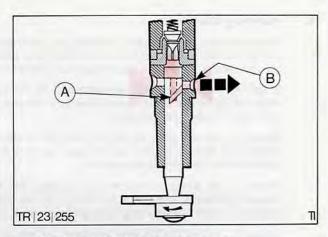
Element positioned during engine idling A – Machined helical slot B – Outlet port
